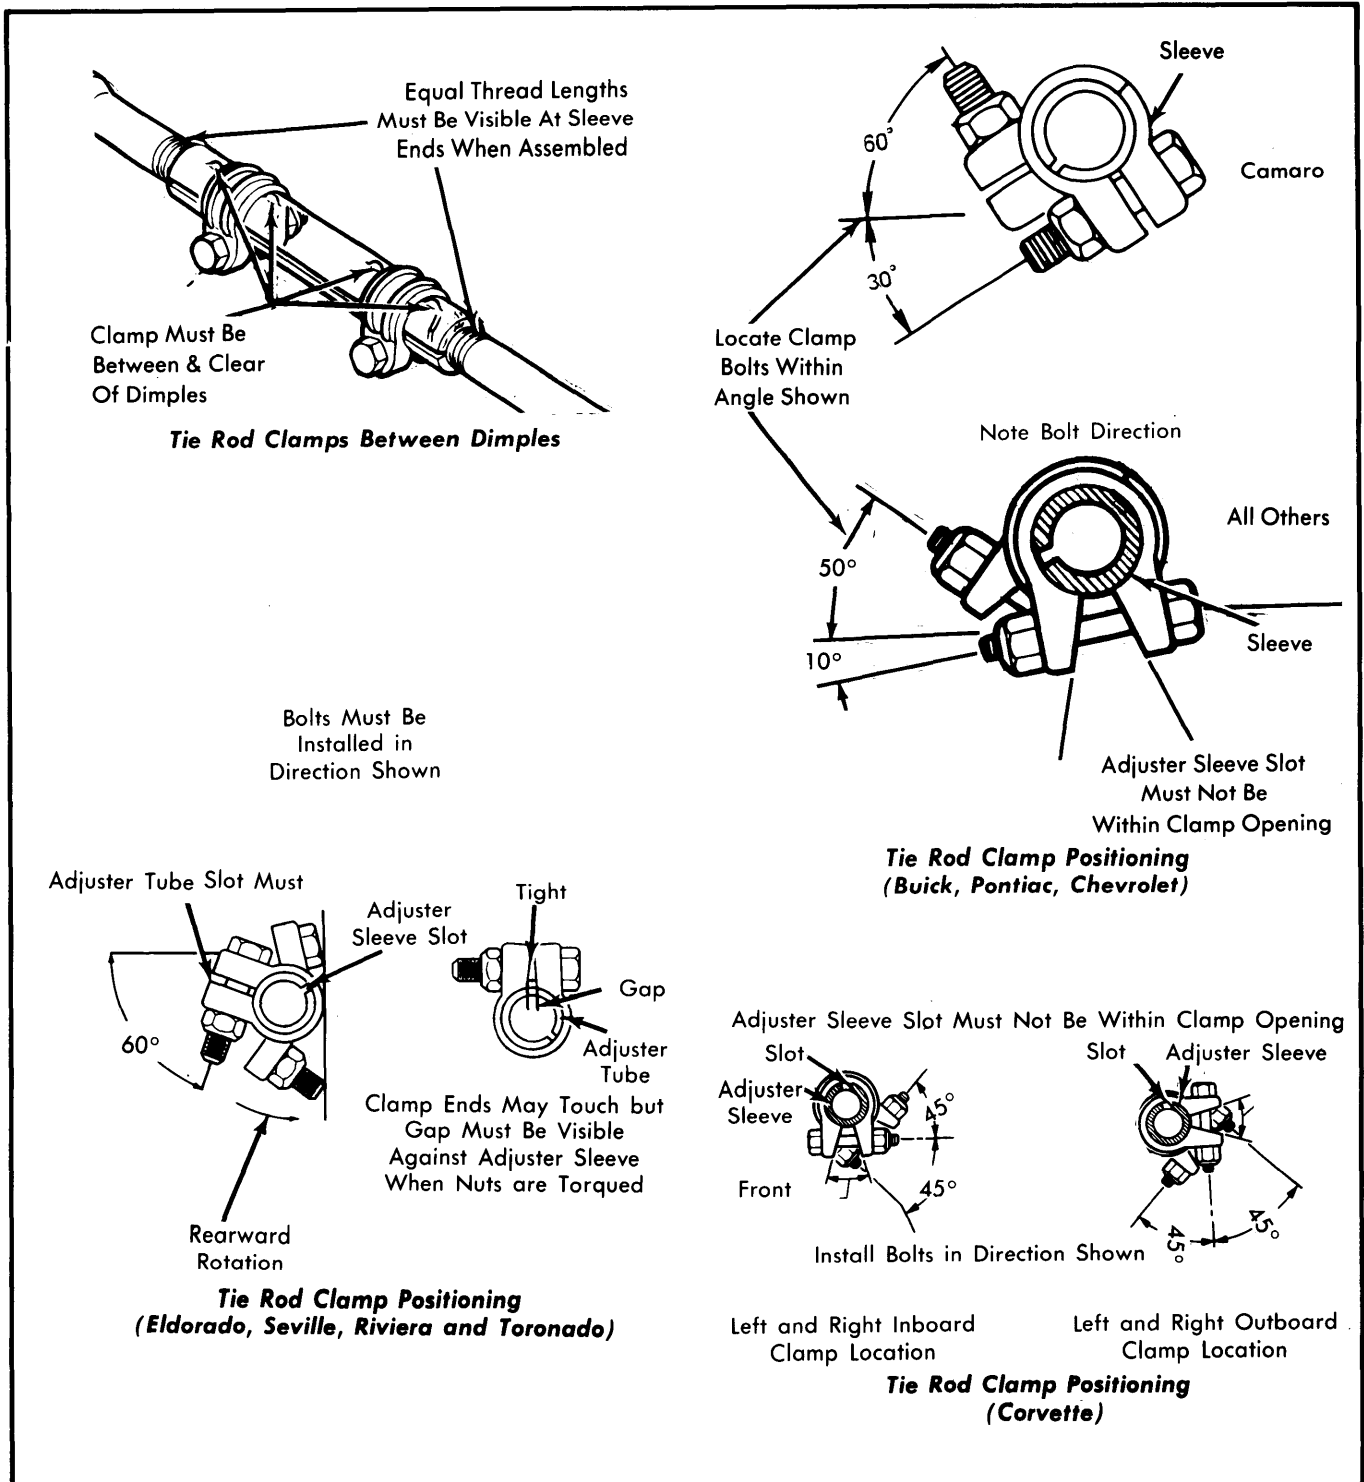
Toe-In Adjuster Tube Clamp & Bolt Position
